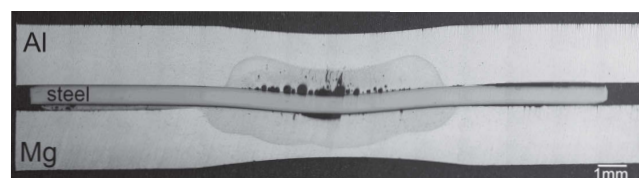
Typical Al/Mg weld made with a Zn-coated steel interlayer and 28-kA welding current.
